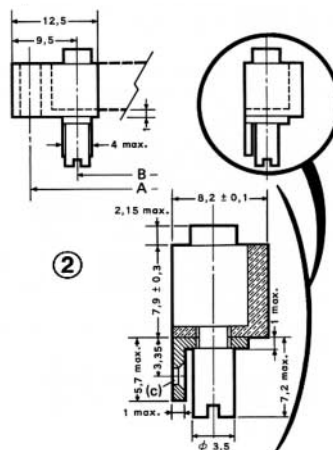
sockets with brackets (c) hole Ø 1.6 with 90° milling
